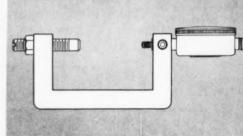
Gaging fixture designed for the purpose of gaging larger type of components.
